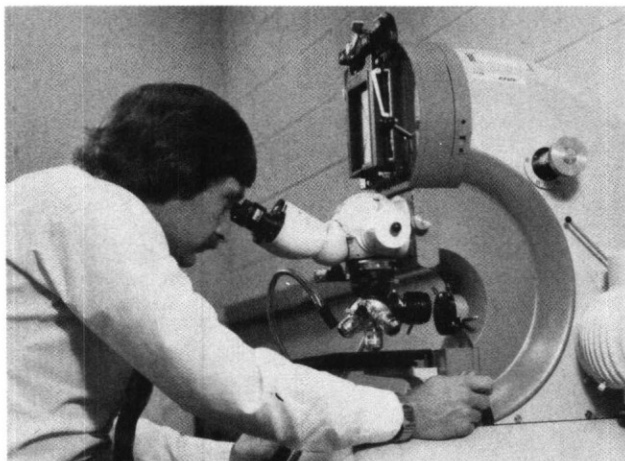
Engineer using optical microscope to examine failed integrated circuit.
